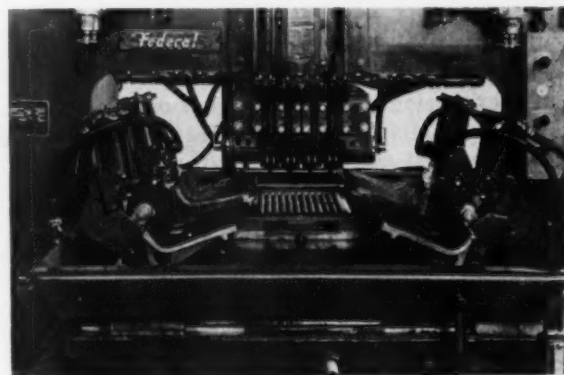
Evaporator assemblies are welded with this four-headed roll-spot welding machine. Two thicknesses of 302 stainless are used with spots at 1/4 in. centers and welding is done at speeds of 20 to 25 fpm. Photo courtesy Federal Machine & Welder Co.
